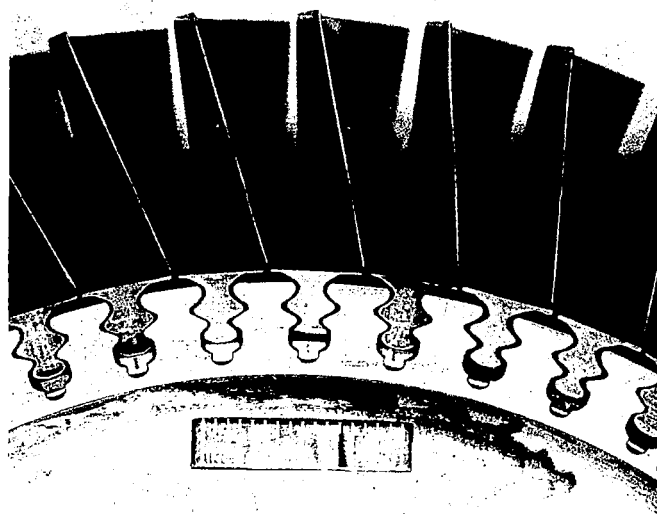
Third-Stage Rotor Blades With Tip Shrouds Removed and New Blade Retainers. (P69-5-38AG)
